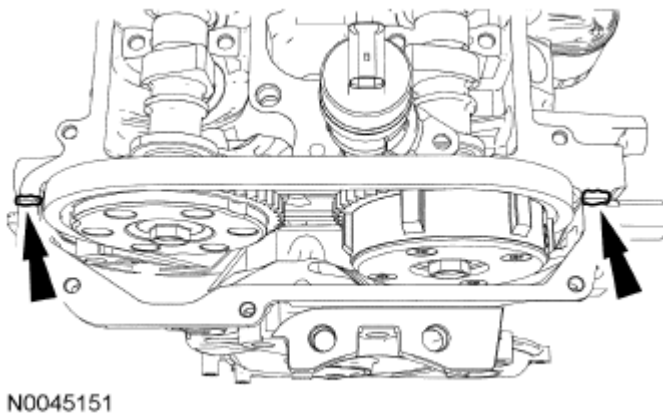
Locating Silicone Gasket And Sealant Applying Locations
